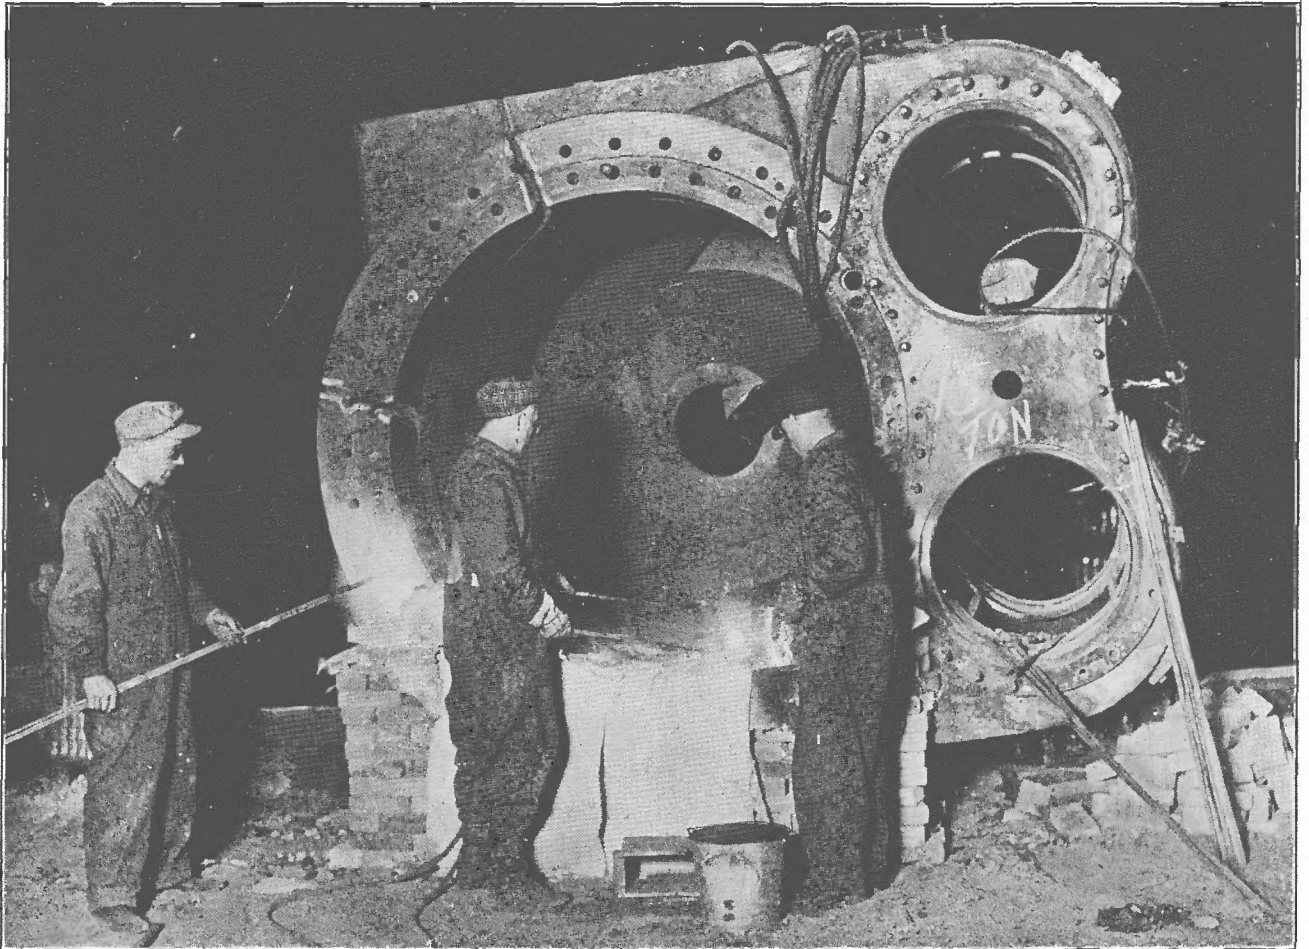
Low-pressure cylinder of rolling mill engine being repaired by welding.
